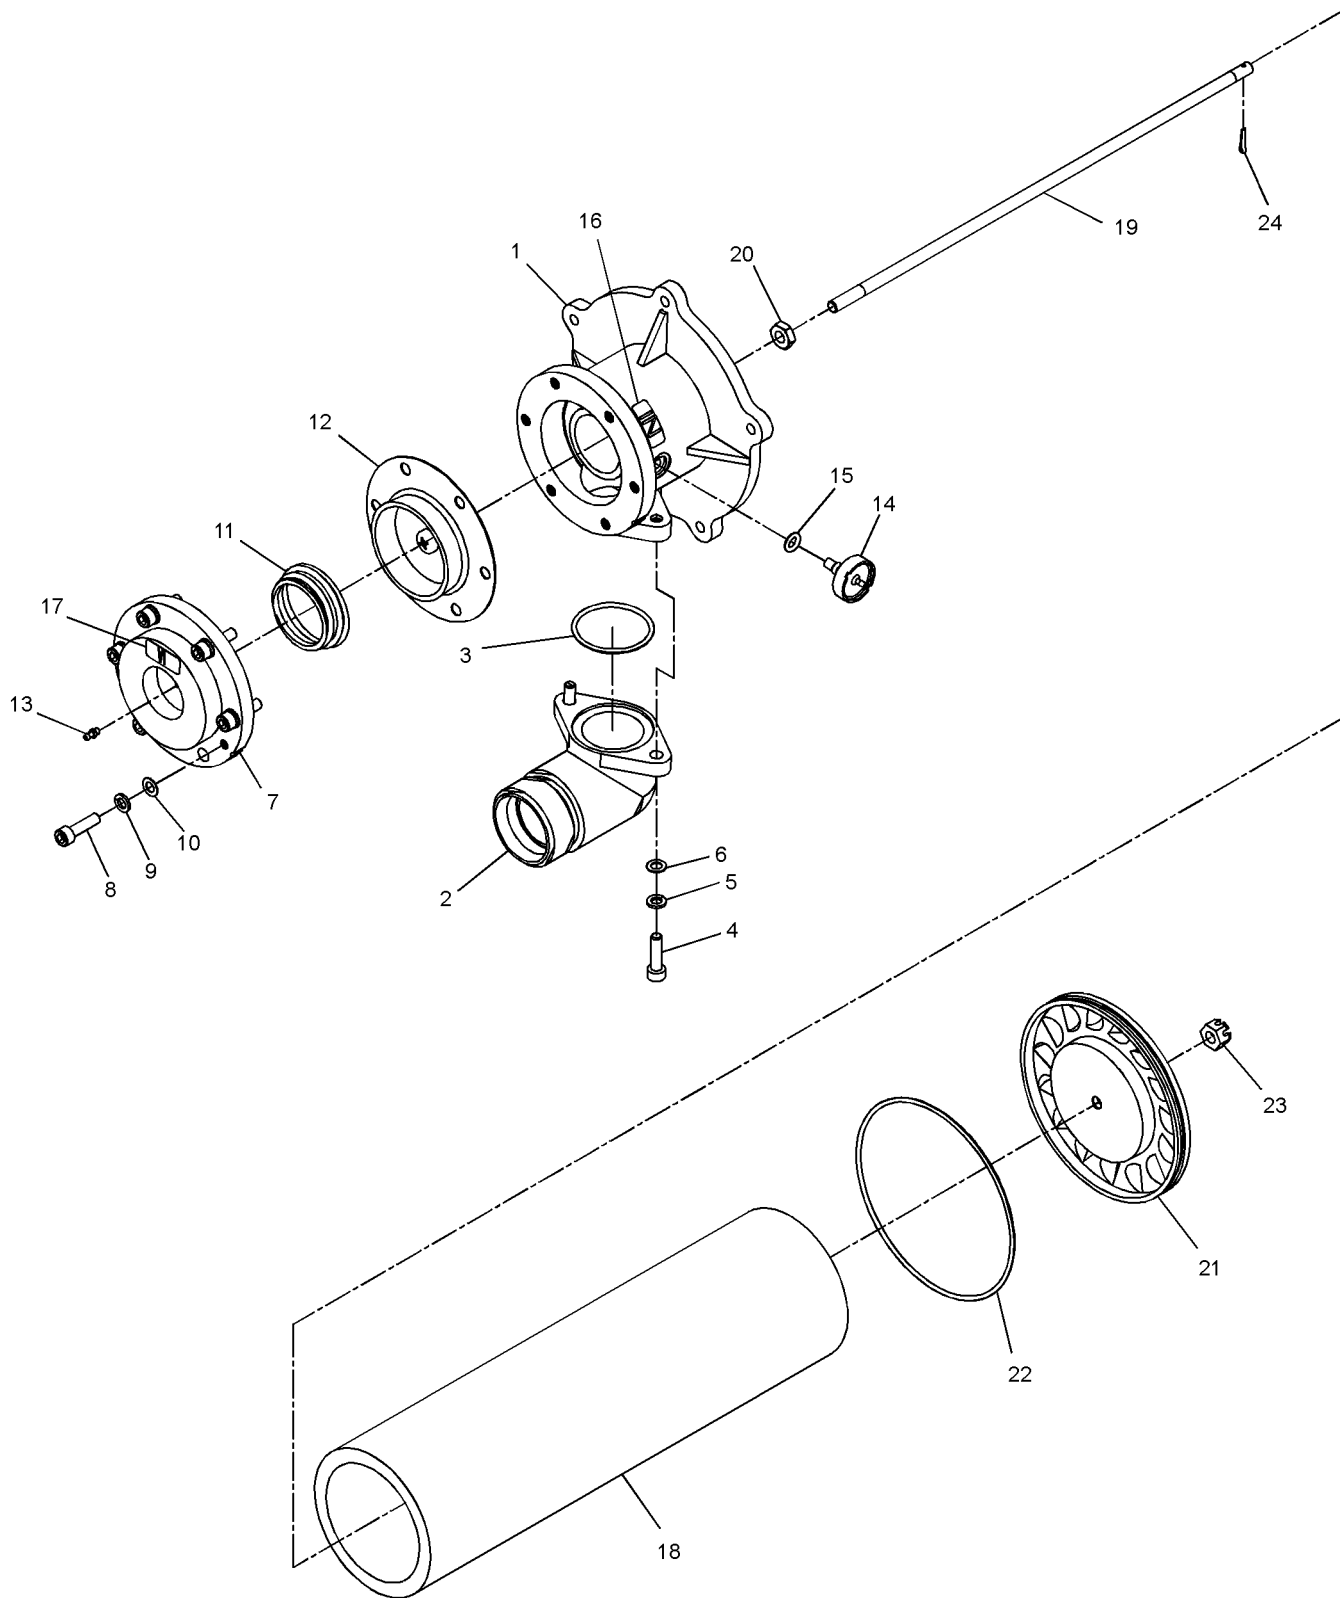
Shutoff Valve and Filter Assembly, P/N 1653695-1
